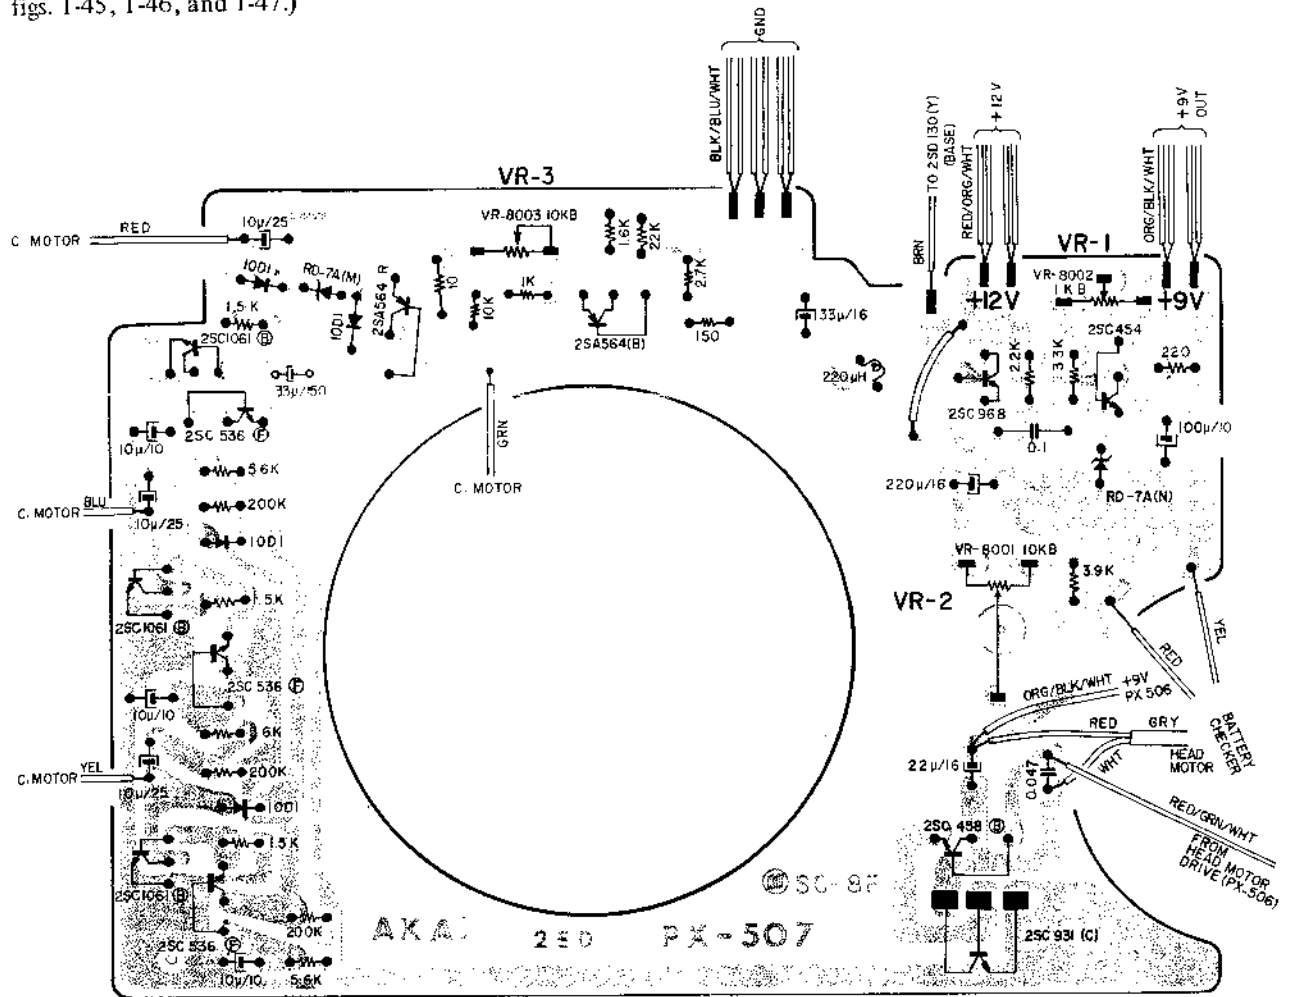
C.M.D. P.C. Board (PX-507)
